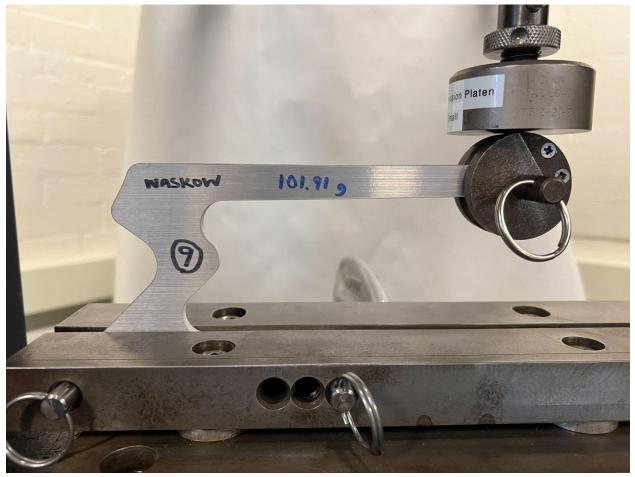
Instron Machine testing setup for first design. Notice the two pins that hold the part which allow rotation (and thus different deflection than if they were clamped.)
